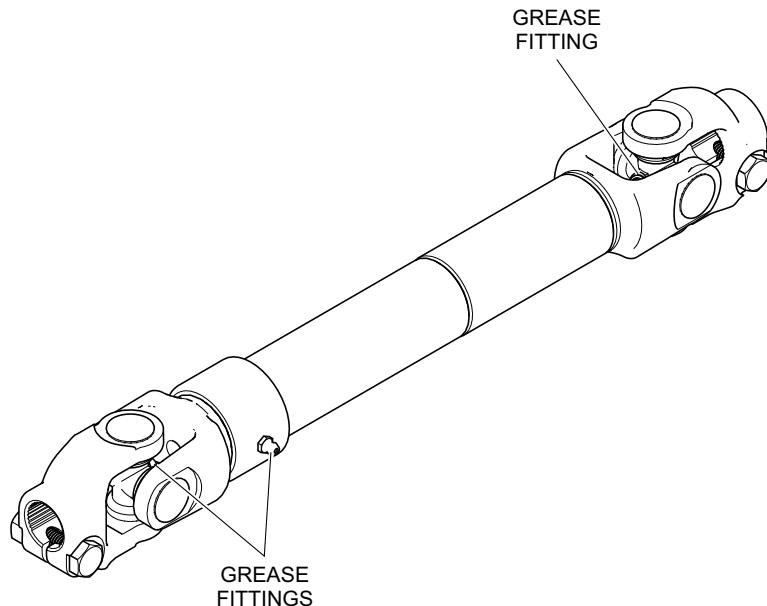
Steering Driveshaft Spline Backlash Inspection
